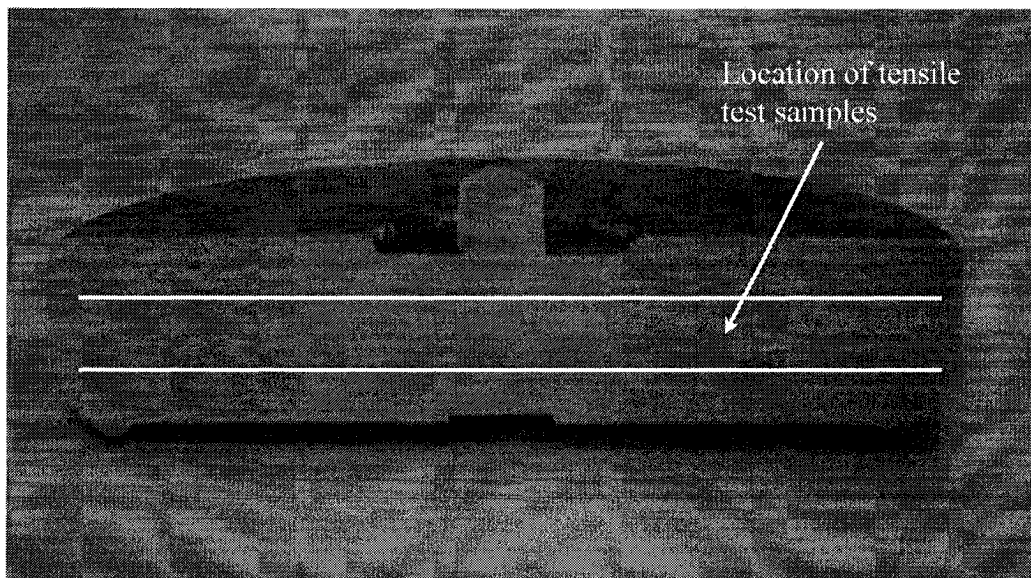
Photograph showing the location of the coupon from which samples were taken for tensile testing.
